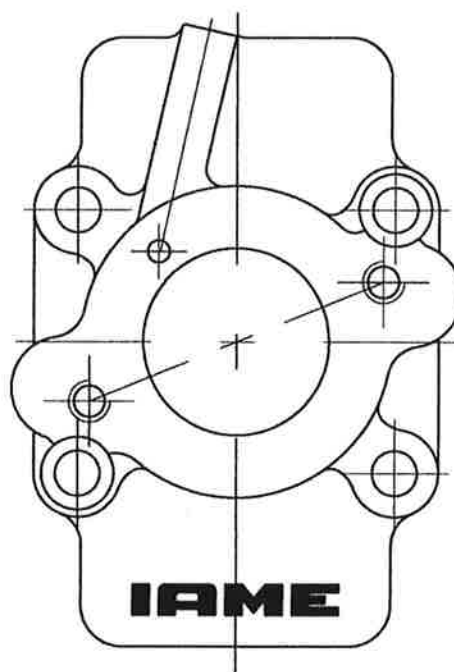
PHOTO IDENTIFICATION CARBURETTOR INLET CONVEYOR
